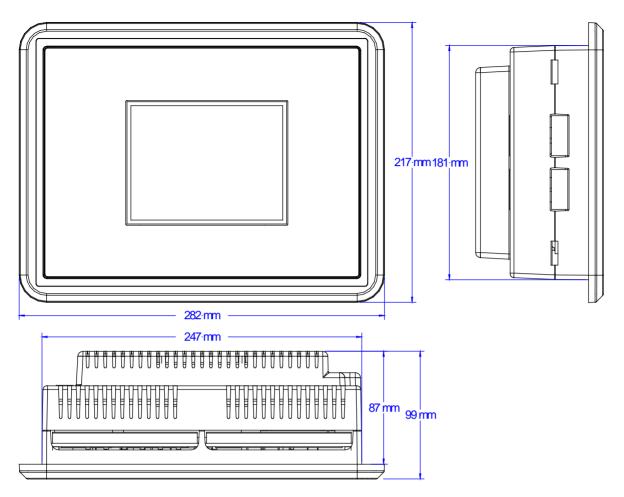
Plastic housing easYgen-3200 - dimensions
